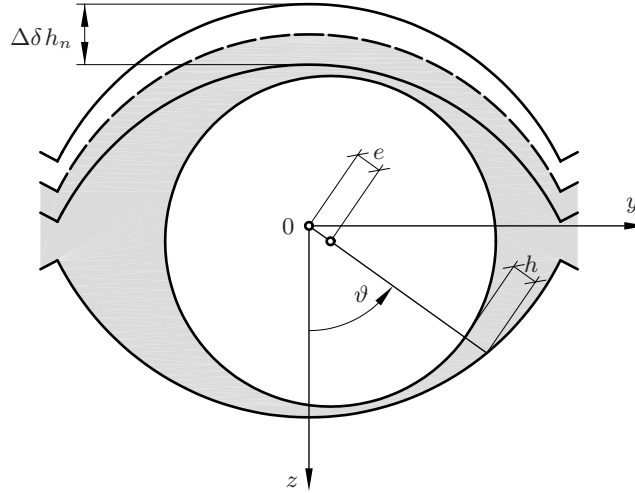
Principle of the adjustable journal bearing; a movement of the upper segment is shown.
